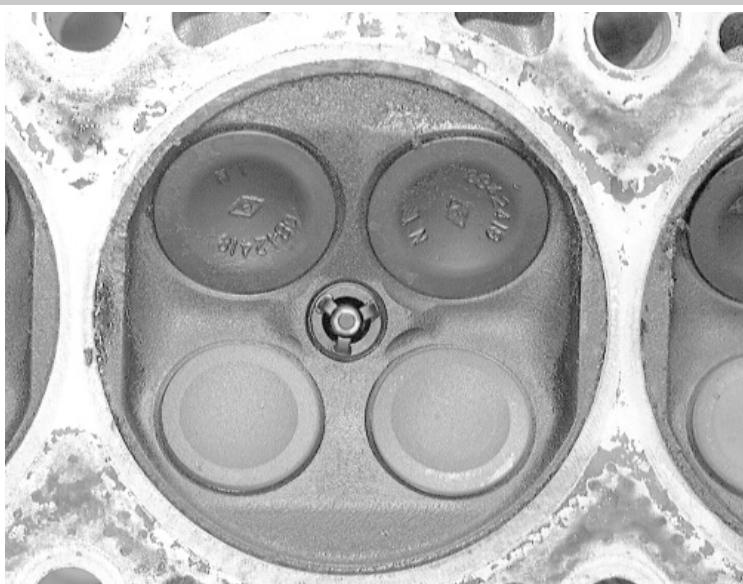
View of the combustion chamber, including the intake (larger) valves, exhaust (smaller) valves, and spark plug electrodes
